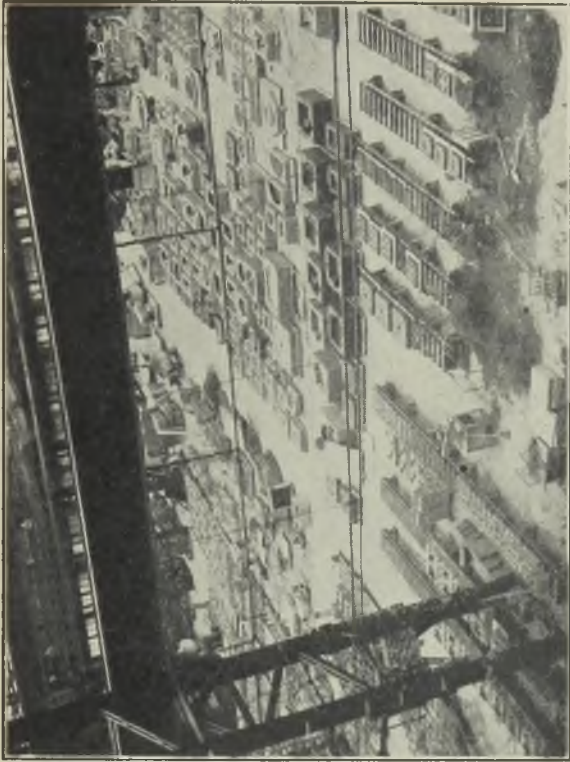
VIEW OF FOUNDRY SHOWING TYPICAL SMALL AND MEDIUM MOULDS.
